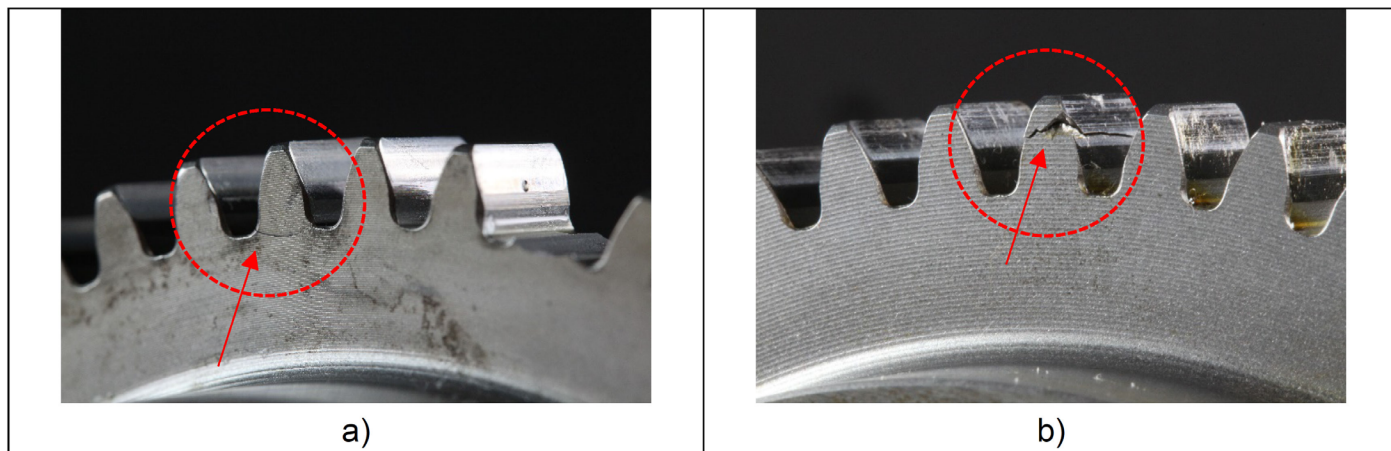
a) Example of a tooth root fracture with crack initiation at or below the surface in the tooth root fillet near the  $30^\circ$  tangent and b) example of a breakage at the tooth flank due to crack initiation at the tooth flank (observed only once each for variant S4 and S6).
